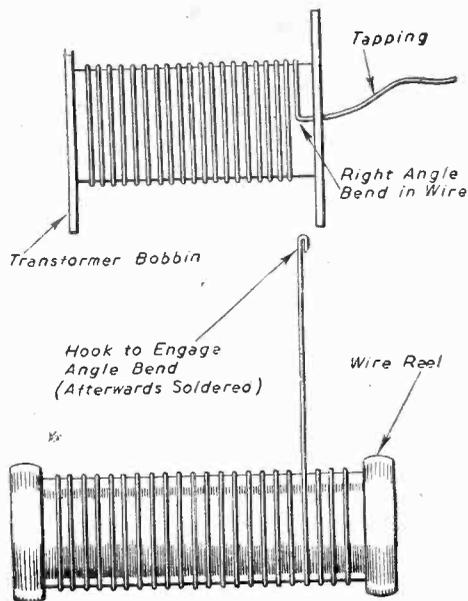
Method of making a tapping when using a heavy gauge of wire.
